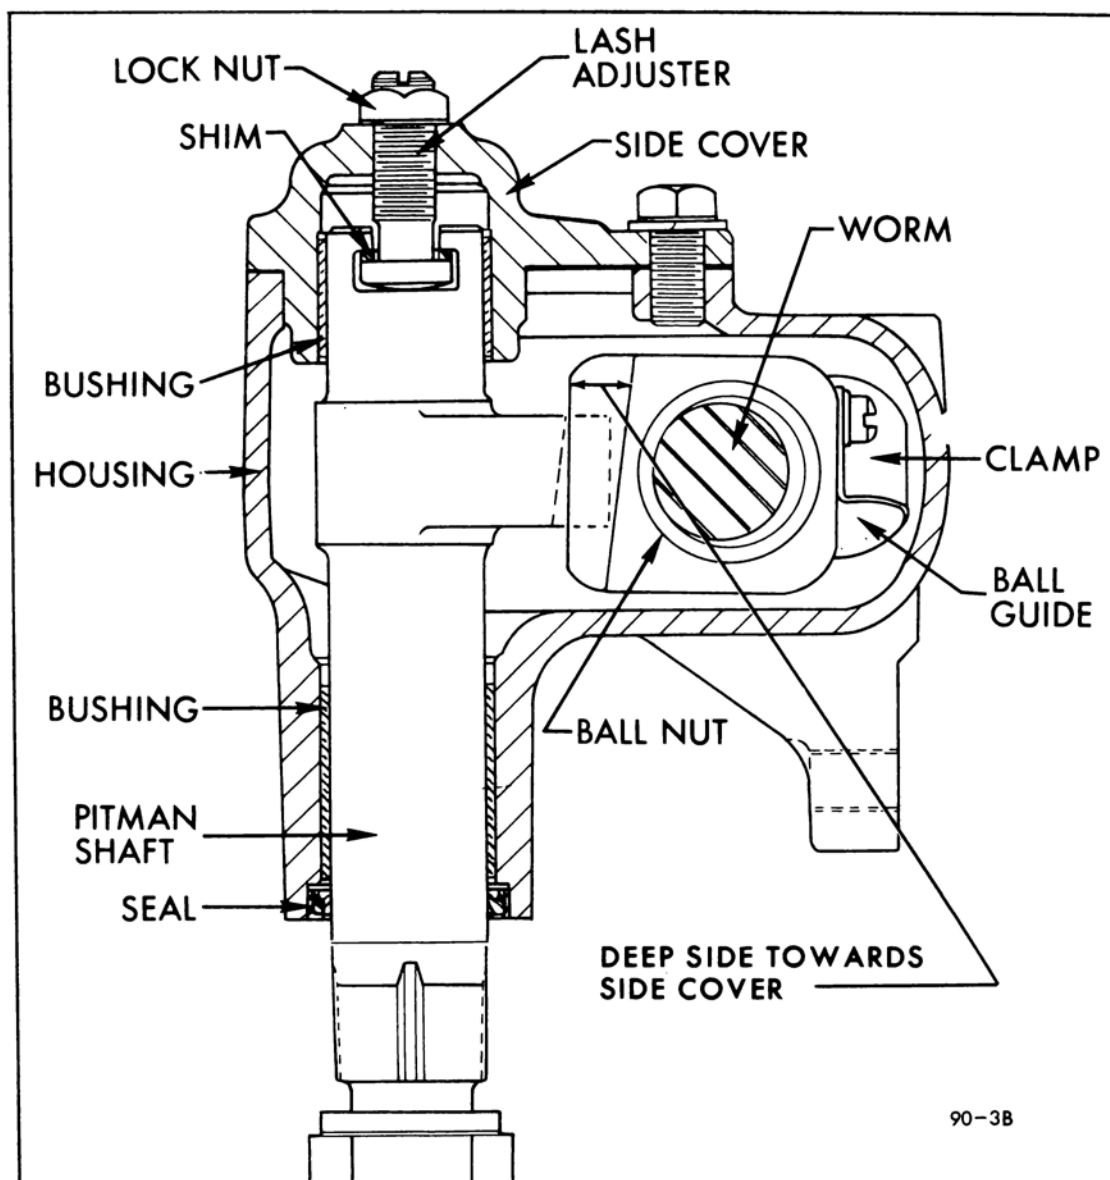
Steering Gear Pitman Shaft and Ball Nut
